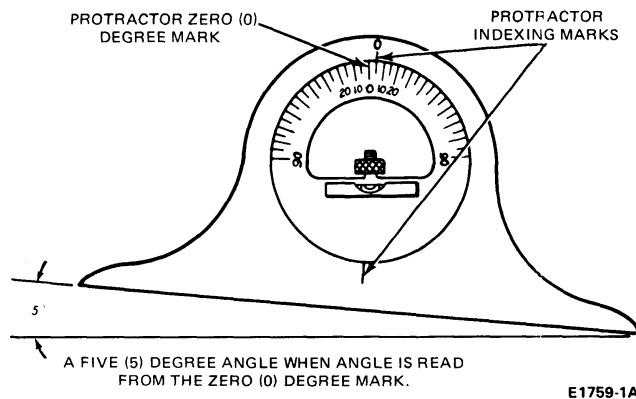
Driveshaft Angle Read From Zero Mark—Horizontal Position
